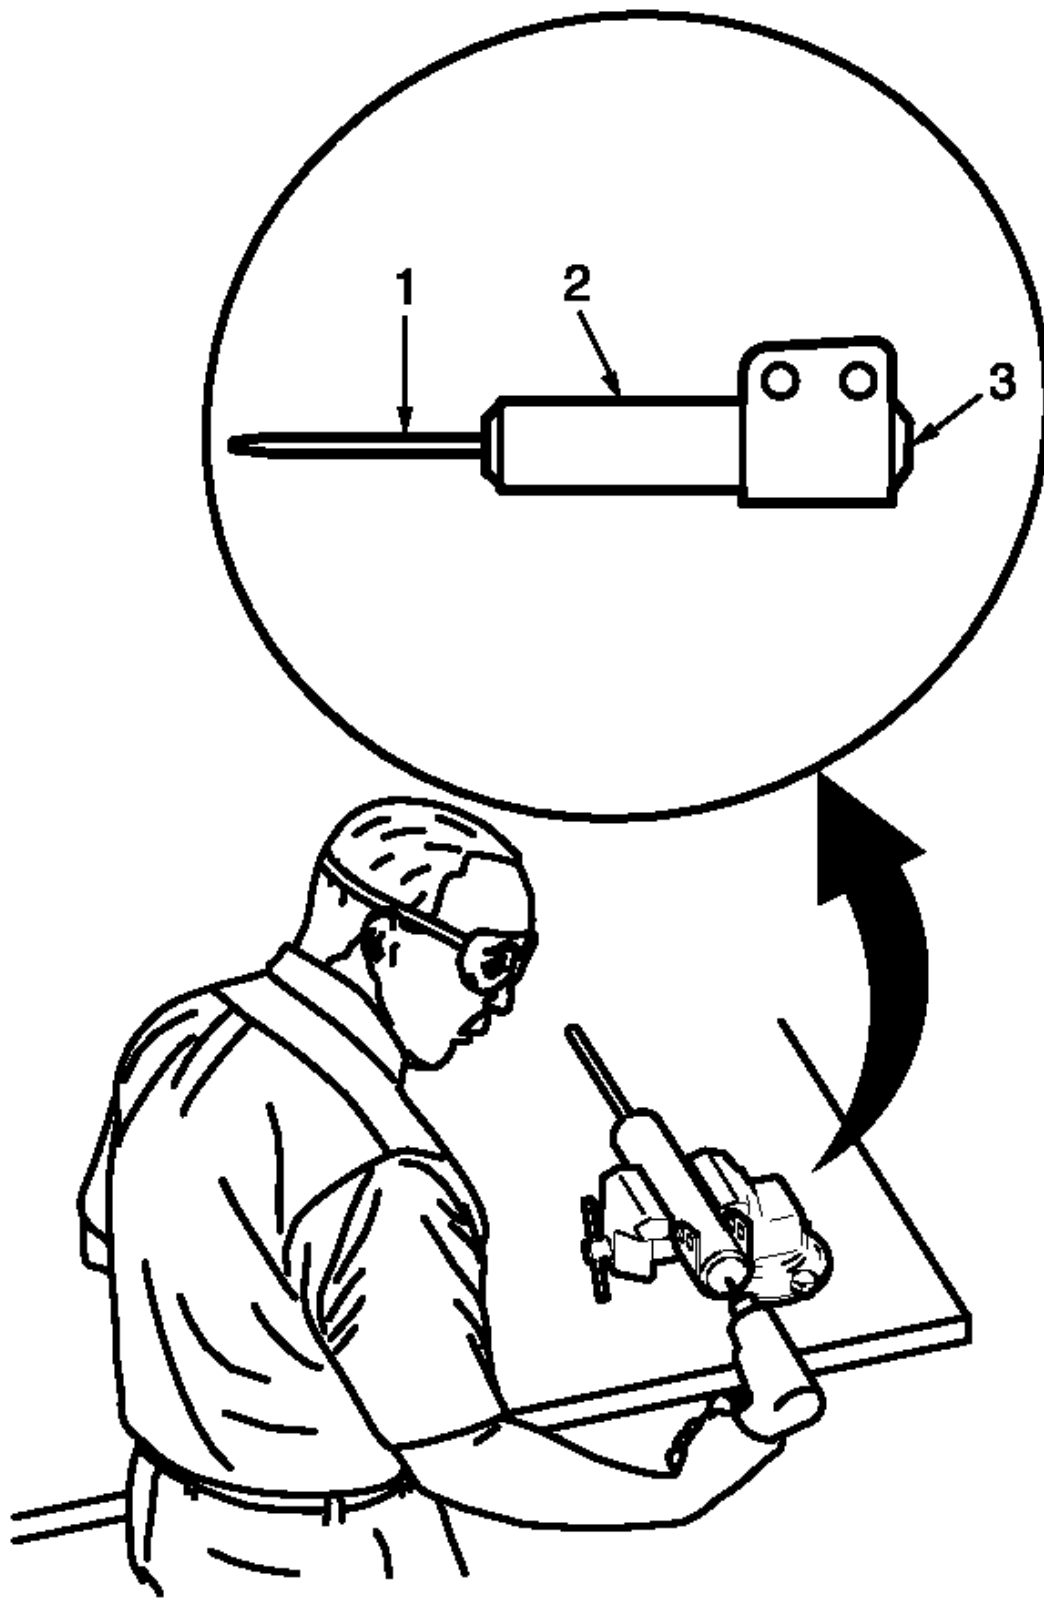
Drilling Hole In Strut At Center Of End Cap
